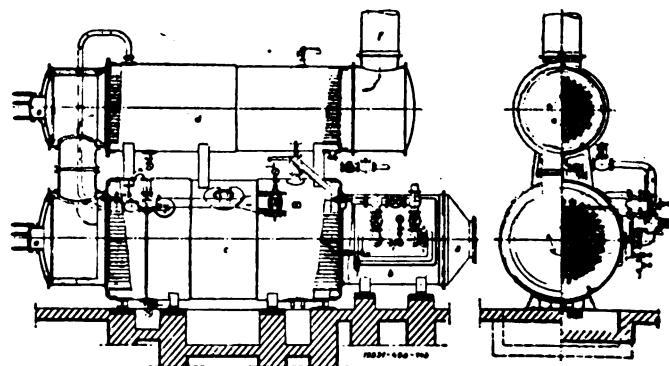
Waste-heat boiler. a = gas admission flange, b = superheater, c = waste-heat boiler, d = feed heater, f = chimney.
